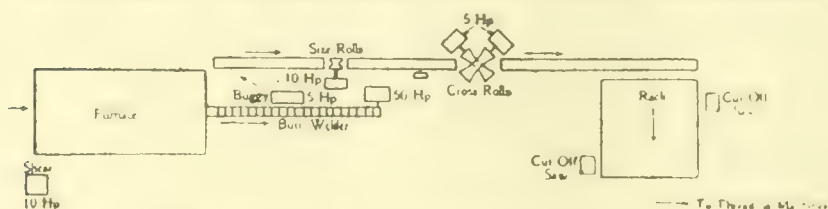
DIAGRAM OF A TYPICAL BUTT WELD TUBE MILL.
